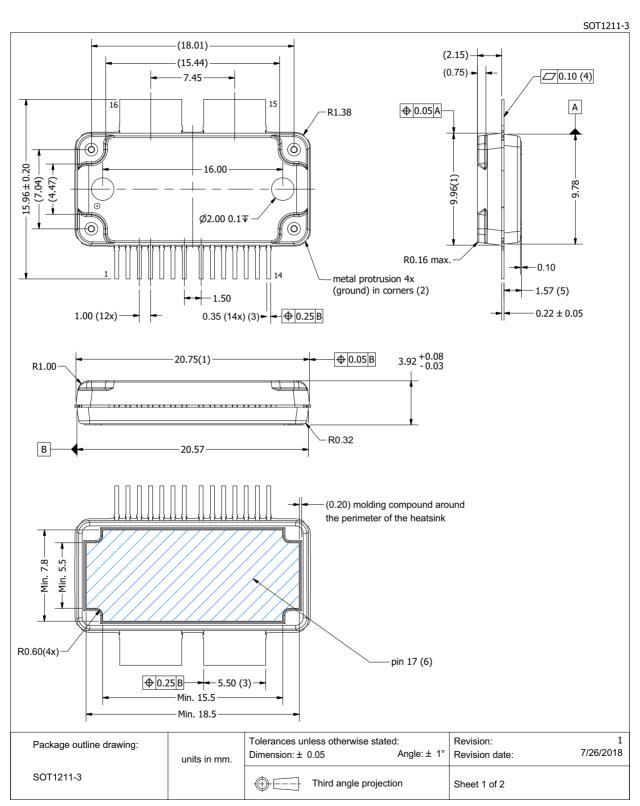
Package outline SOT1211-3 (sheet 1 of 2)
